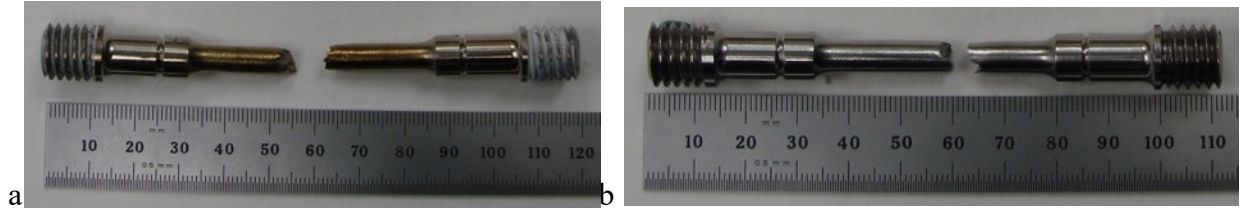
Images of fractured cross-weld tensile specimens (a) GTAW at 538°C and (b) GMAW at 149°C.
